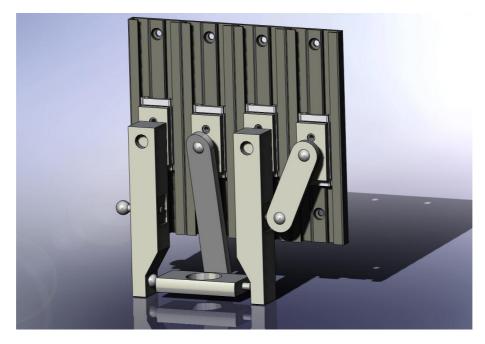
Design of a parallel structure to manipulate the welding torch.
